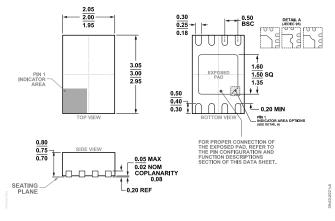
8-Lead Lead Frame Chip Scale Package [LFCSP] 2 mm × 3 mm Body and 0.75 mm Package Height (CP-8-31) Dimensions shown in millimeters
